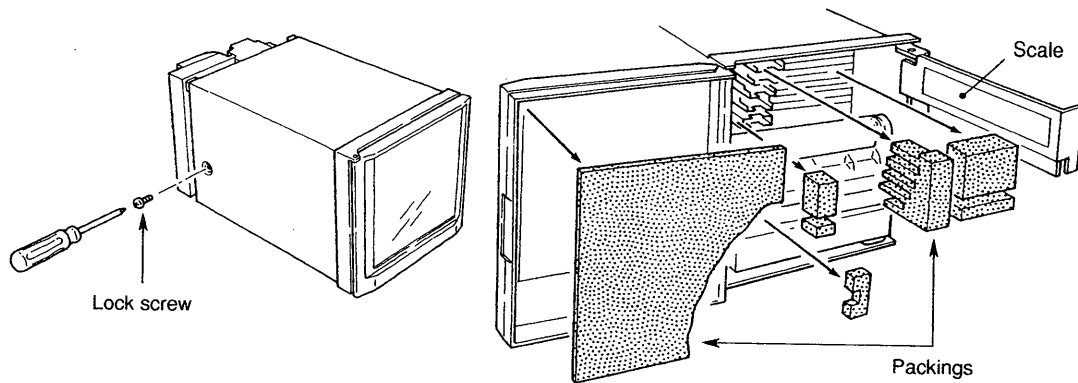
Removing Lock Screw and Packings for Transit (Pen Model)
